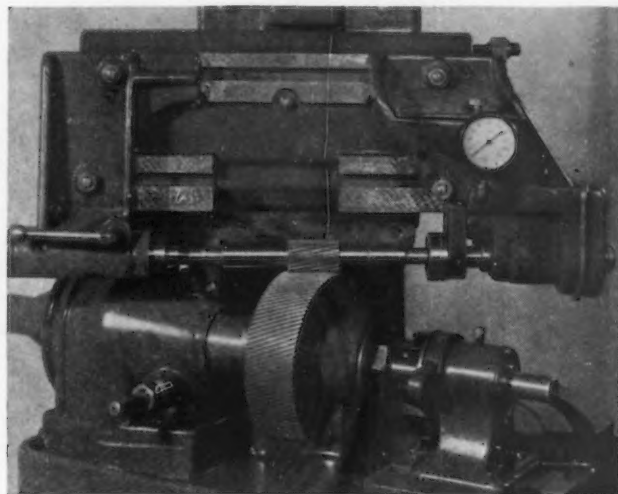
, Fig. 15—Lapping machines arranged for power tailstock lapping. The center distance between gear and lap remains constant and a power tailstock is used to effect a braking action on the work gear, which is driven by the lap. The amount of braking force is regulated to suit the work being processed. One side of the gear teeth is acted upon at a time, and by reversing the rotation at the mid-point of the cycle, both sides of the gear teeth are corrected.
